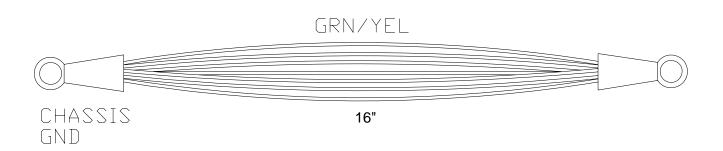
VLX3 Yoke to Head Chassis Ground Cable Assembly
